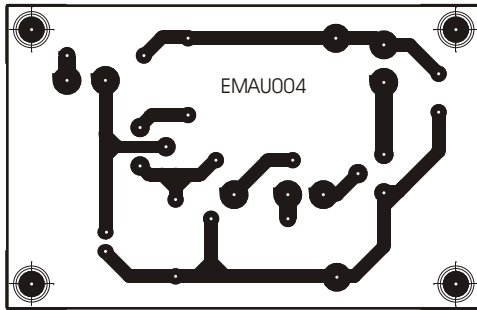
Actual - size, solder-side PCB layout for the Metronome
